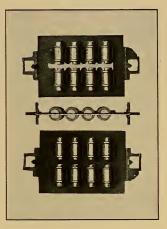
Upper left—Cope mould; right—Cope side of plate. Lower left—Drag side of plate; right—drag mould.
